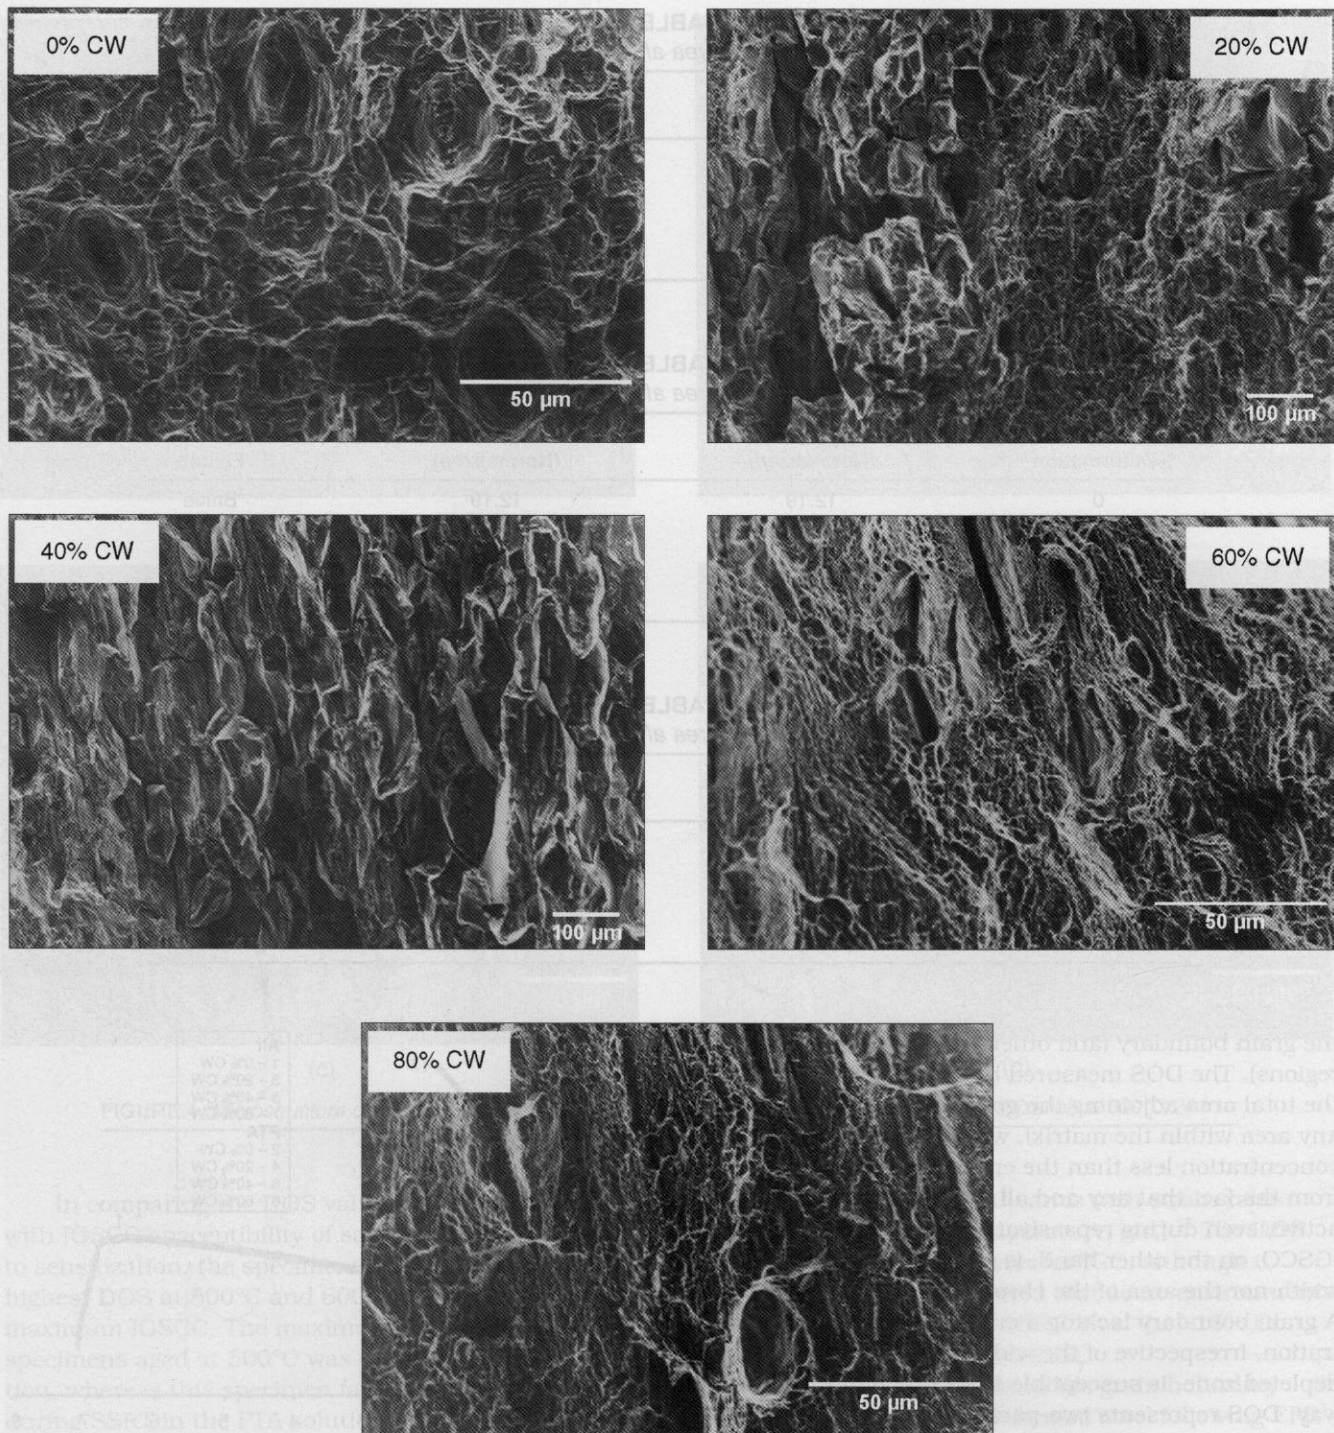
Fractographs of samples treated at 500°C/24 h after fracture during SSRT.
